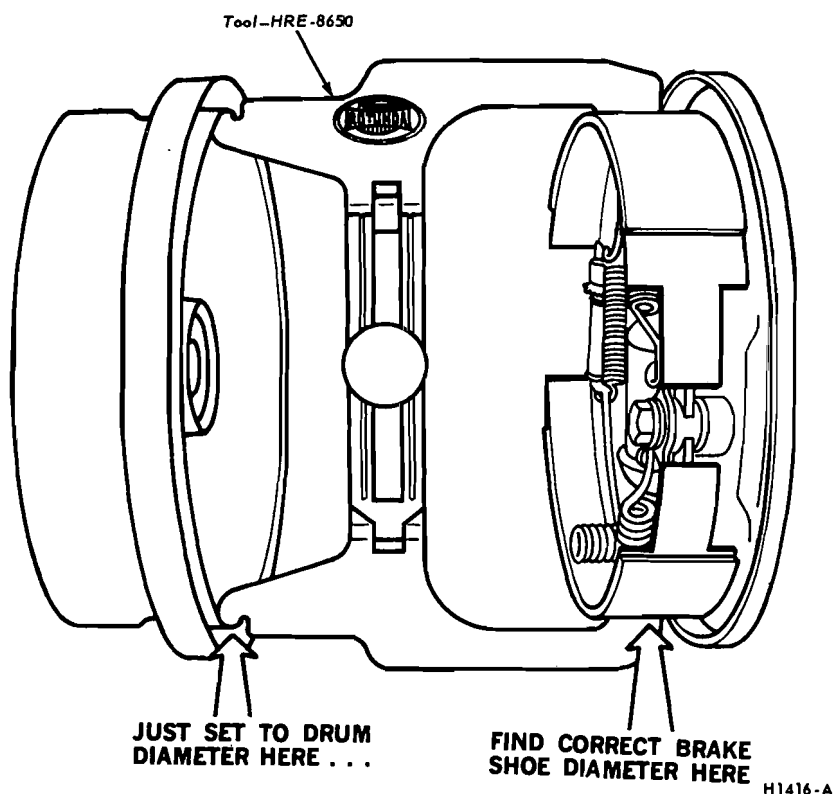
Adjusting Brake Shoes Using Tool HRE-8650
